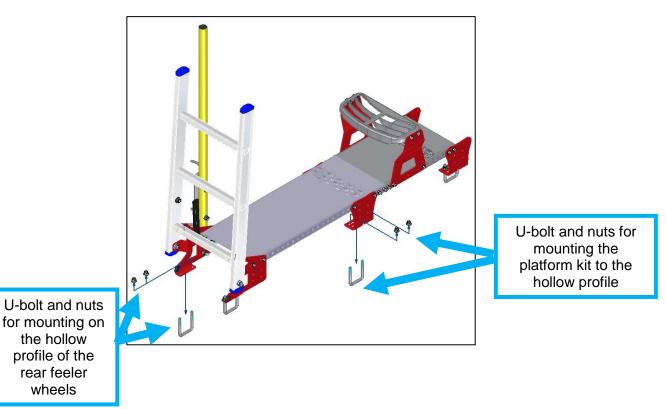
Components of the platform kit VS600-1200 with rear feeler wheels
